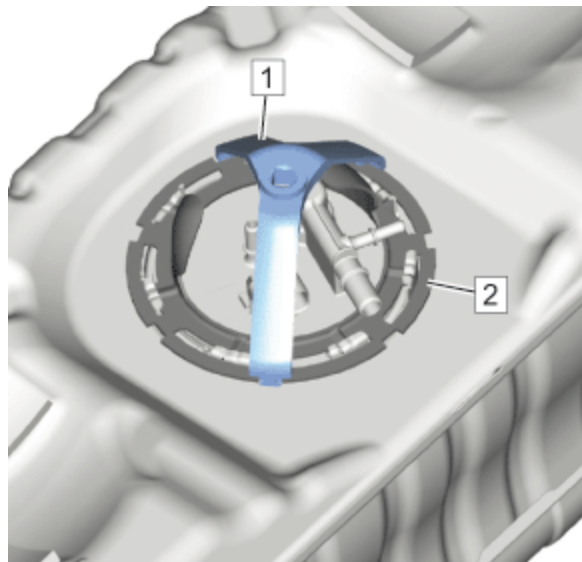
Fuel Pump Module Lock Ring And Wrench
